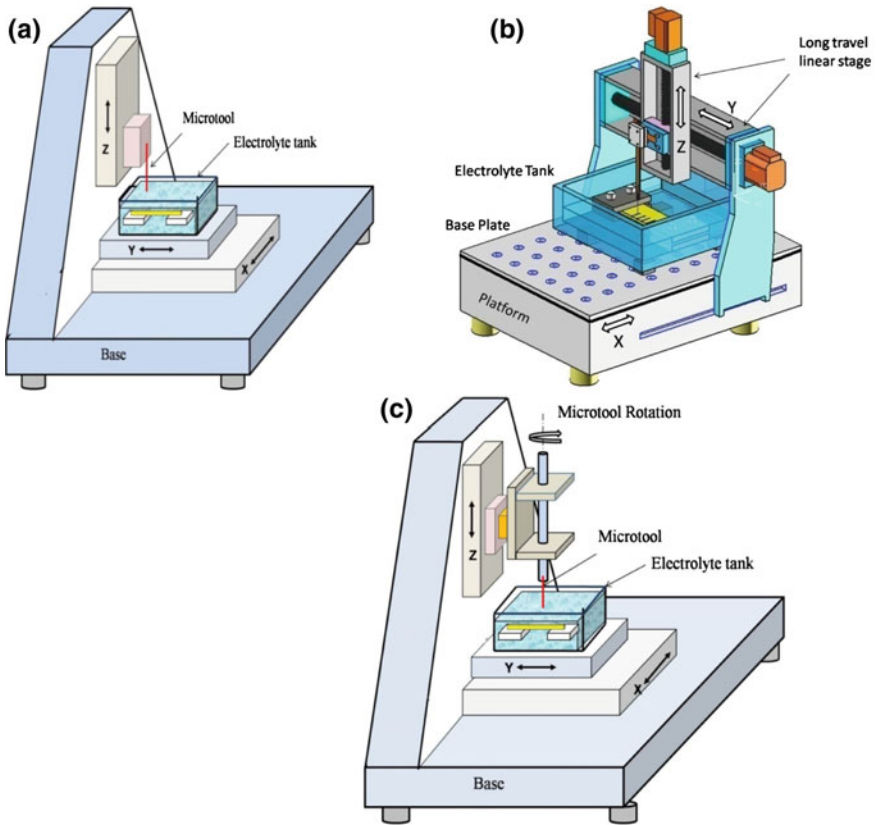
Different types of Mechanical Machine units a column and Knee type, b gantry type, and c structure with rotational axis
